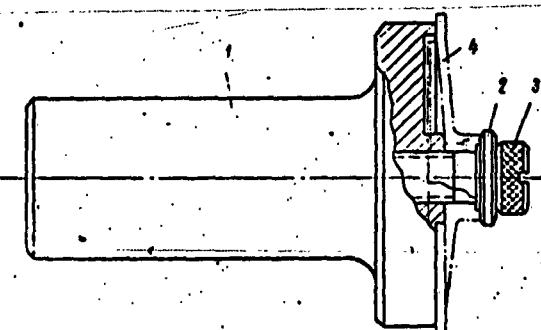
Mandrel for outside machining of cover. 1) Mandrel; 2) washer; 3) nut; 4) cover.
